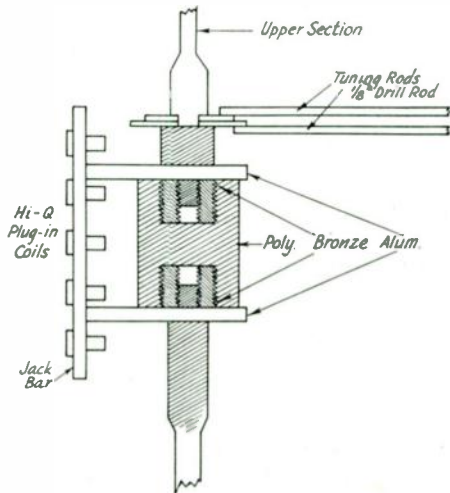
Construction details of the mounting for the rods and plug-in coil.
